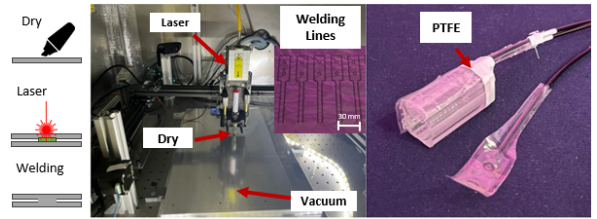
a) Illustration of the sensing patch fabrication process using laser welding. b) Image of the laser welding machine with the sensing patch placed on the sheets. c) Integration of sensors onto the backbone structure.
